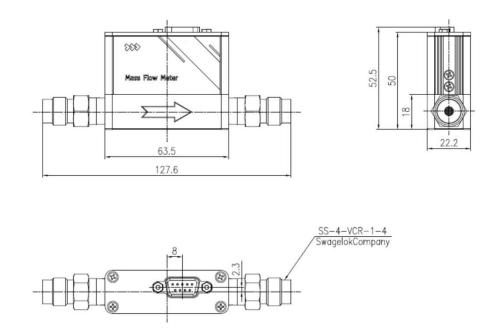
MFS3000 dimensions with VCR 1/4" connectors (<20SLPM).
